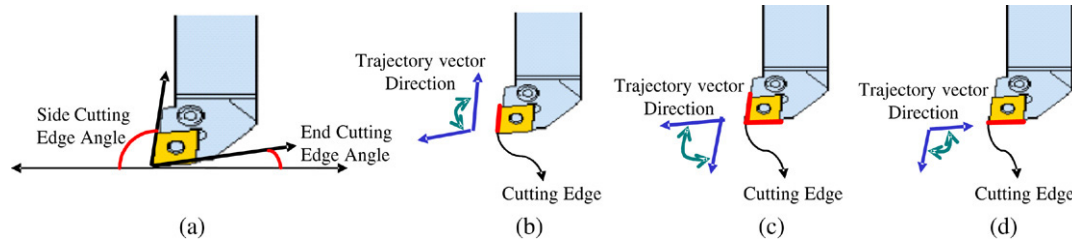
Cutting edge of general turning tool by cutting direction. (a) General turning tool and cutting edge angle, (b) when side cutting edge, (c) when both edges are cutting edges, (d) when end cutting edge.
